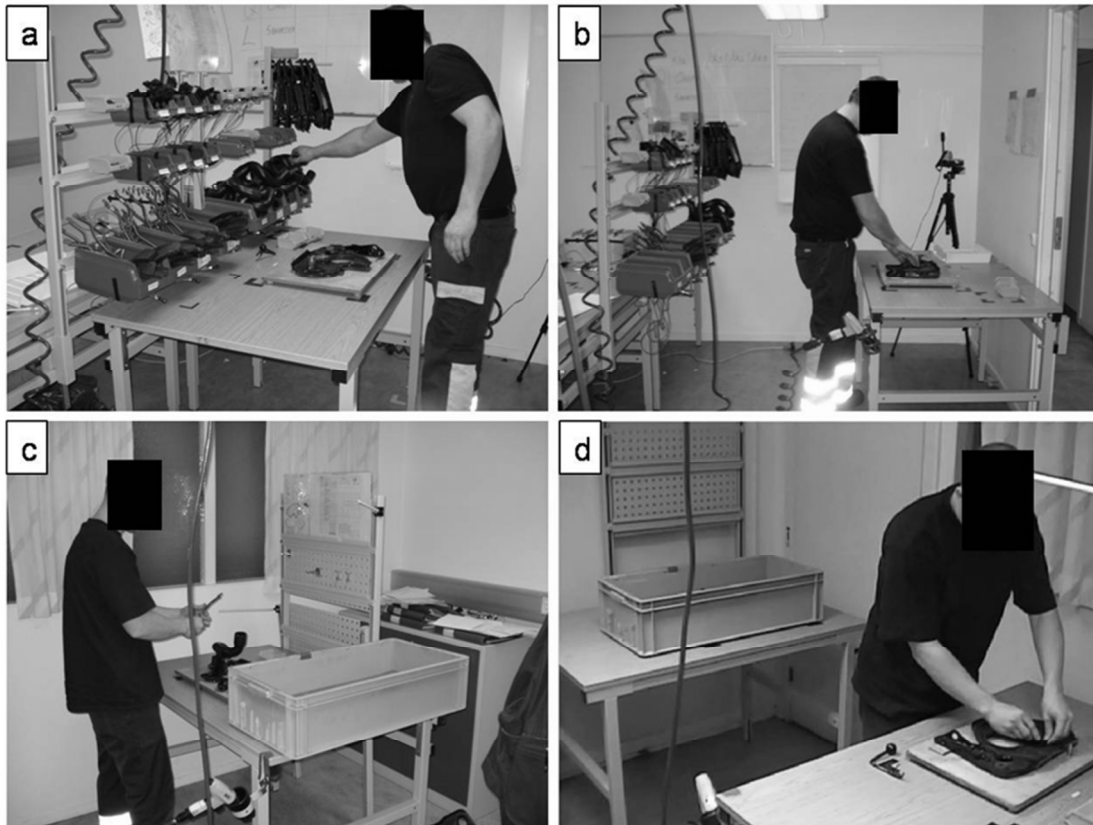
a) Component racks by assembly object (configurations 1, 2, 5, 6), b) component racks opposite to assembly object (configurations 3, 4, 7, 8), c) kit by assembly object (configuration 9) and d) kit opposite to assembly object (configuration 10)
